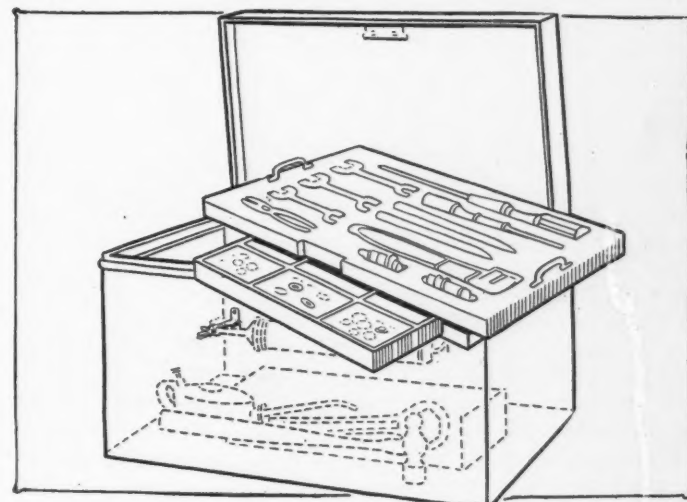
WELL EQUIPPED TOOL BOX OF THOMAS CARS
